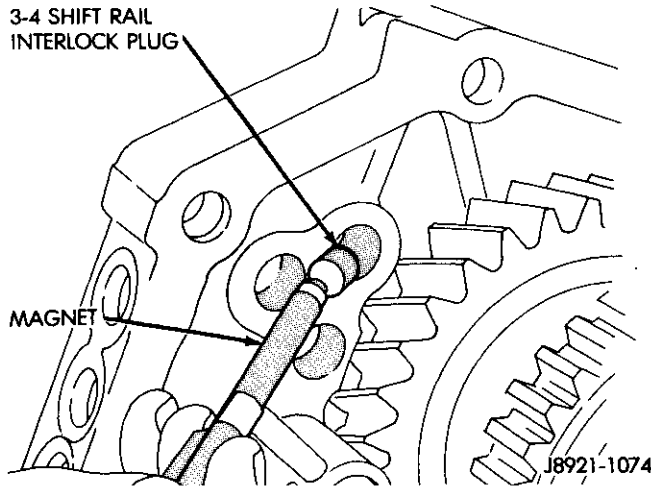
Installing 3-4 Shift Rail Interlock Plug
